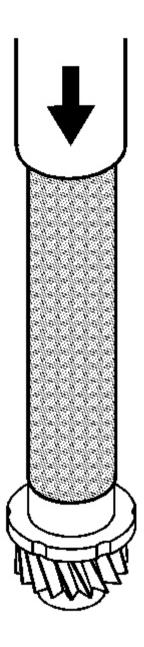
Installing Thrust Washer & Collar Using J 24433 Courtesy of GENERAL MOTORS CORP.
